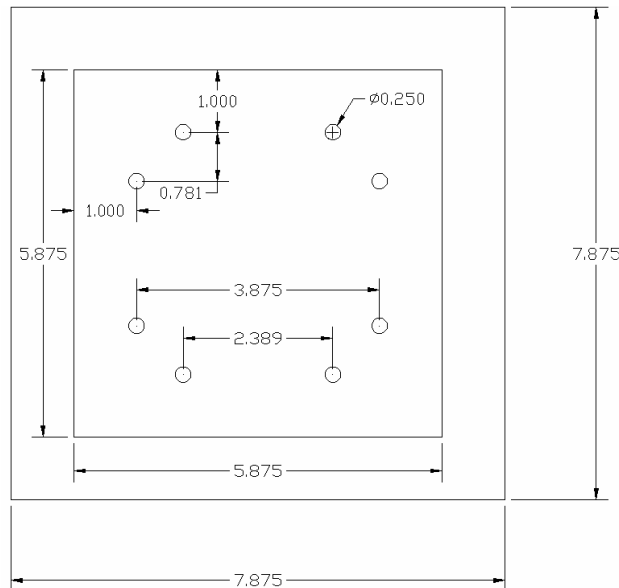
Payload 08 Modified HASP-Provided Mounting Plate
